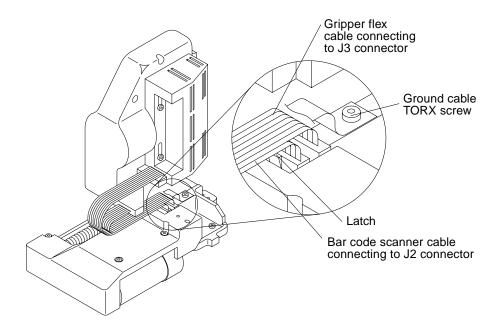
Disconnecting the Gripper Flex and Bar Code Scanner Cables
